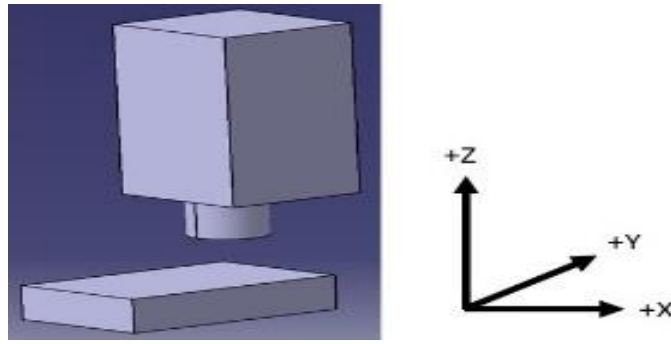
Exploded mode of the assembly in Figure 2.2 (a).
